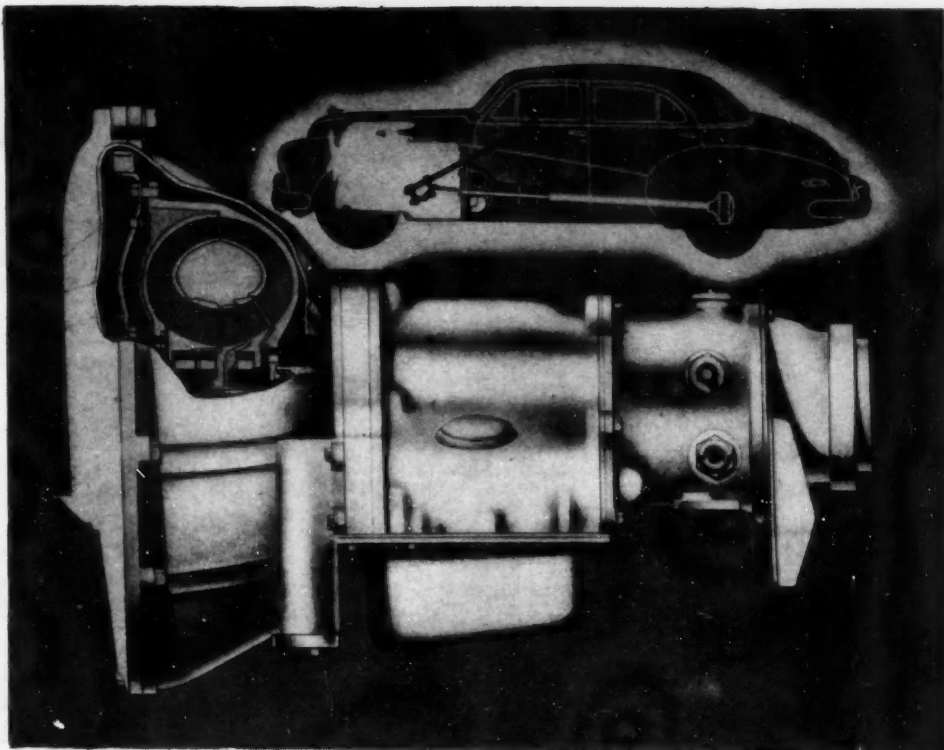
A cutaway view of Buick's Dynaflow transmission. The entire transmission package, containing torque converter and planetary gears, is mounted on the rear of the engine
